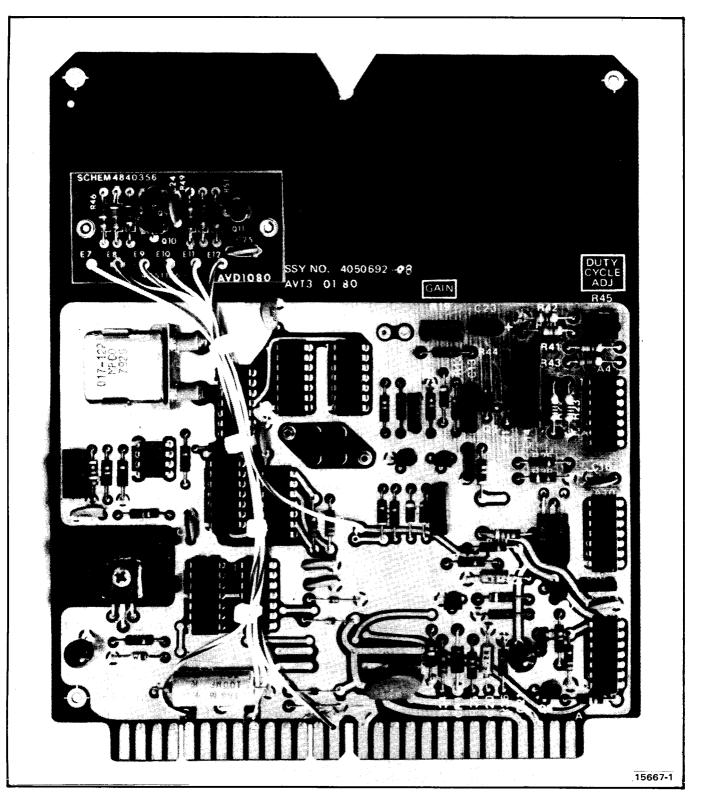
Piggyback Board 4051106 Mounted on Capstan Servo PWA
